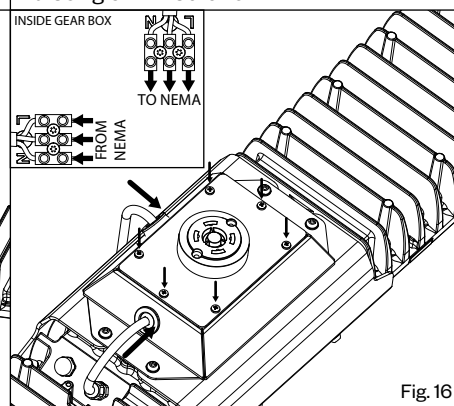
Nema Gear Box Installation Steps 2 - 4. Note: Retrofitting Nema Gear Box Can Only Be Done With 3 Pin Nema Socket, 5 And 7 Pin Variants Can Be Ordered And Installed Before The Unit Is Shipped
